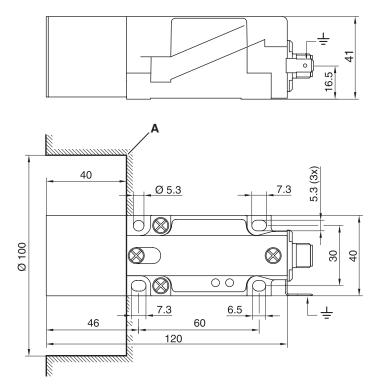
BIS L-409-045-001-07-S4 with integrated read head, dimensions in mm
